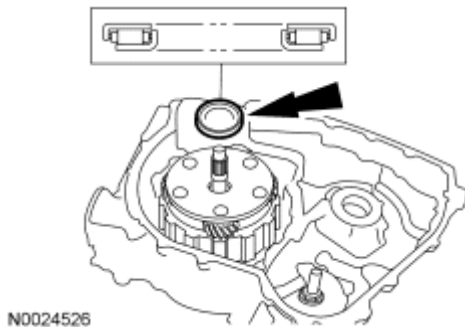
No. 9 Reverse/Overdrive Ring Gear Thrust Bearing
